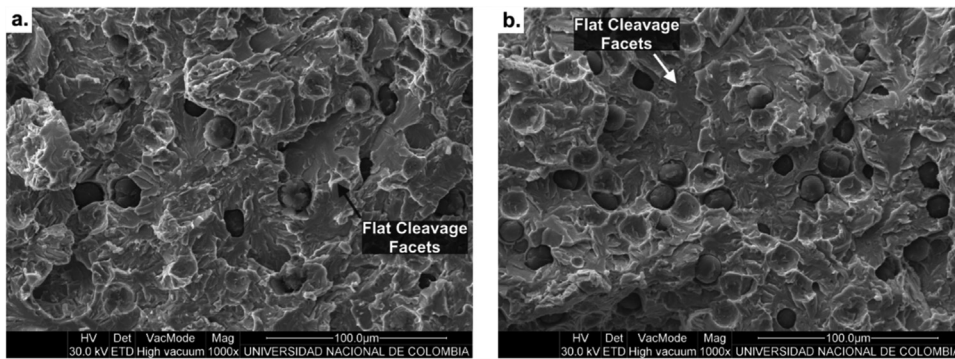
Fracture surfaces of the as-cast samples: (a) CO₂ sand (CS) molds, (b) green sand (GS) molds.
